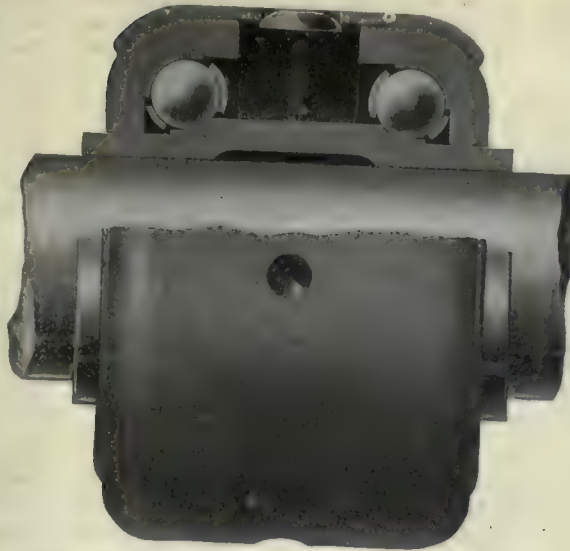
LIGHT SHAFTING BEARING OF PRESSED STEEL CONSTRUCTION.
